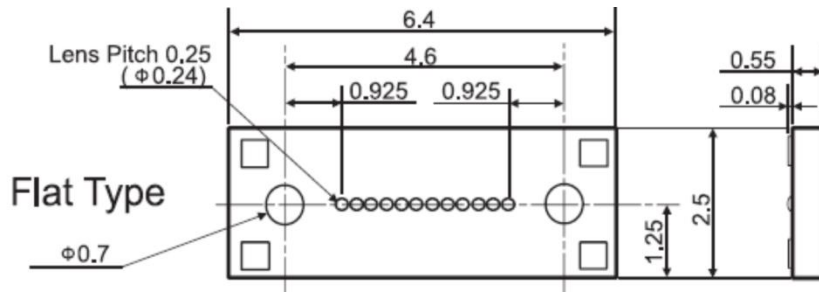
Dimensioned drawings of Omron P1L lens array (Source: Omron)
